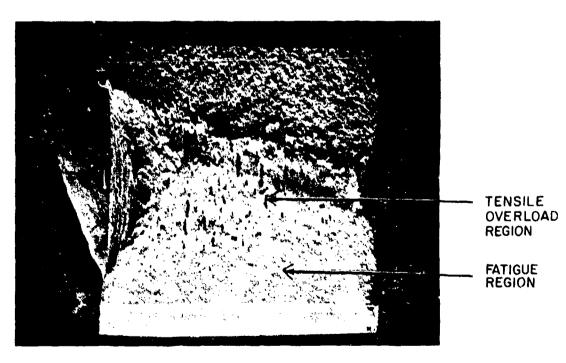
Fatigue fracture surface of A-516 steel, 8x.
